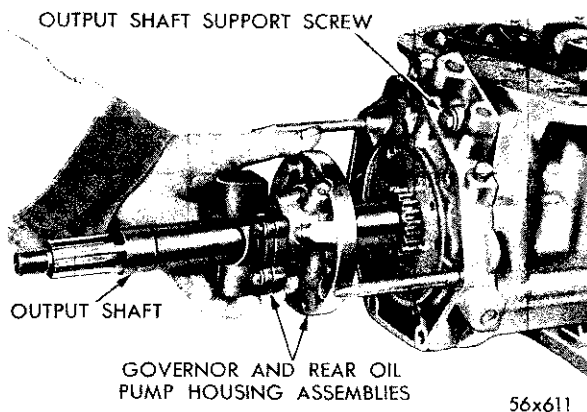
Removal and Installation of Governor and Rear Oil Pump Housing Assemblies
